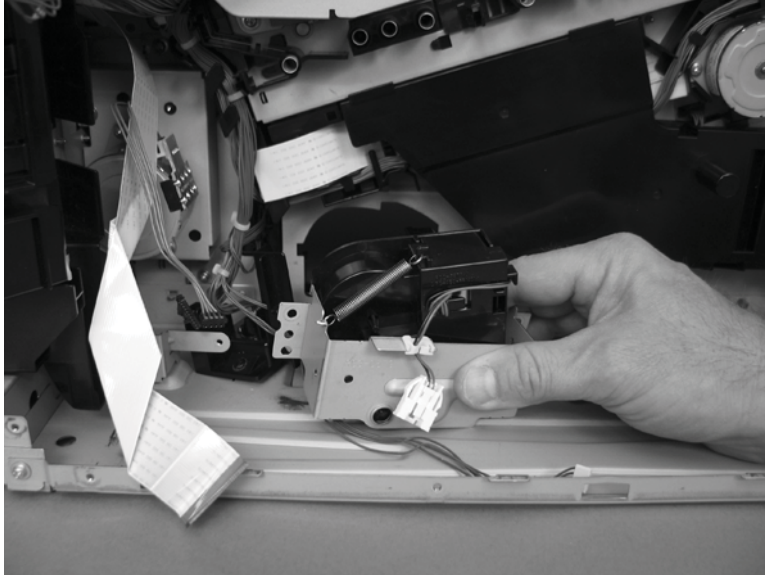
Remove the lifter-drive assembly (2 of 3)
